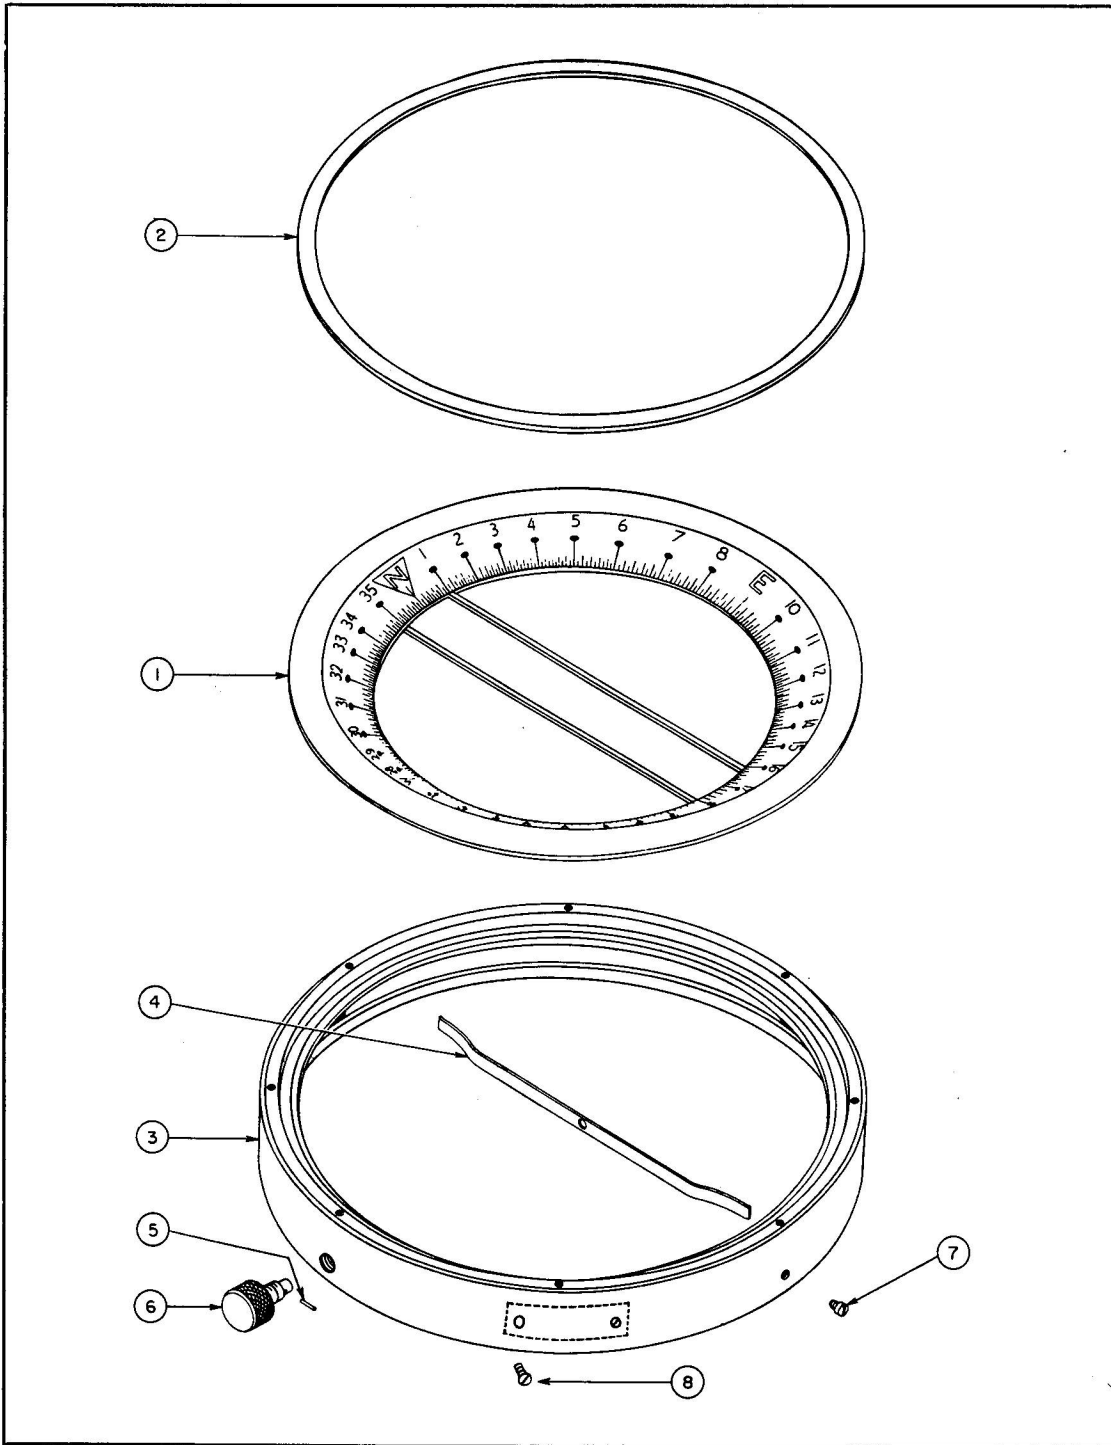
Exploded View - Compass - Bezel Ring Assembly - Type D-12
